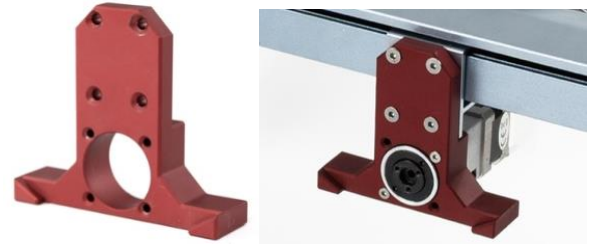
More recent iteration of the custom aluminium mount that integrates the end stop for cutting at up to a $\pm 60^\circ$ cutting angle
